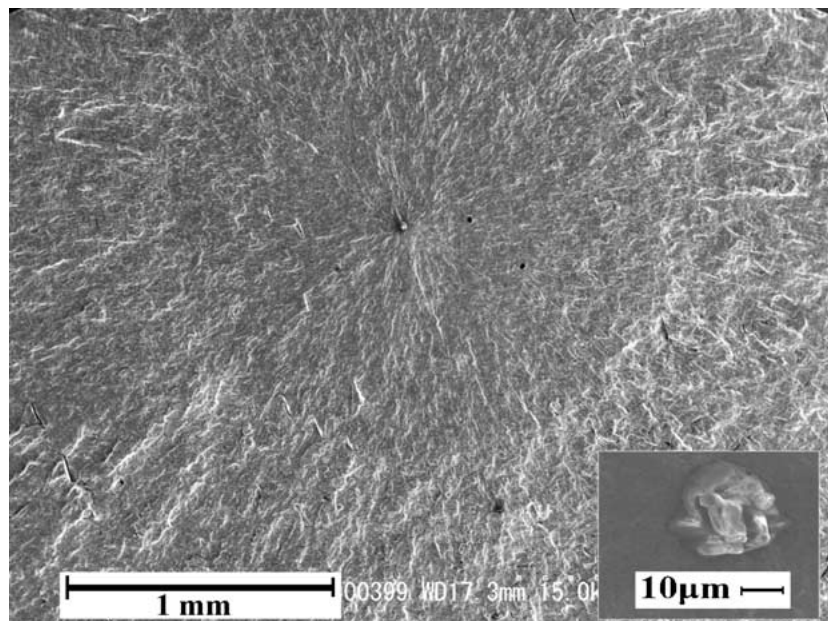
Typical internal fracture surfaces at 650°C over  $10^6$  cycles.
